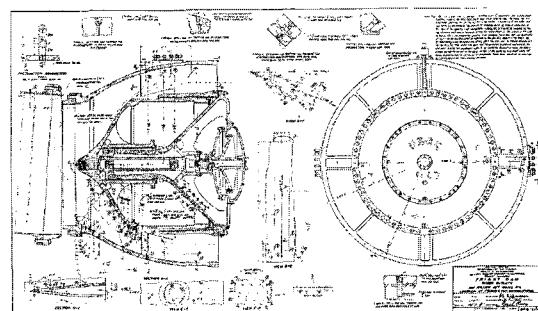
Drawing of installed the hollow jet valve at friant Dam
